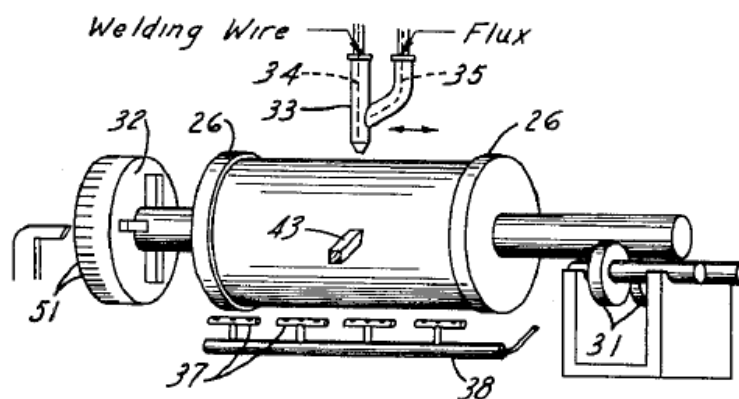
Schematic showing the reconditioning method of pressure rollers using wire and arc welding (White, 1964).
